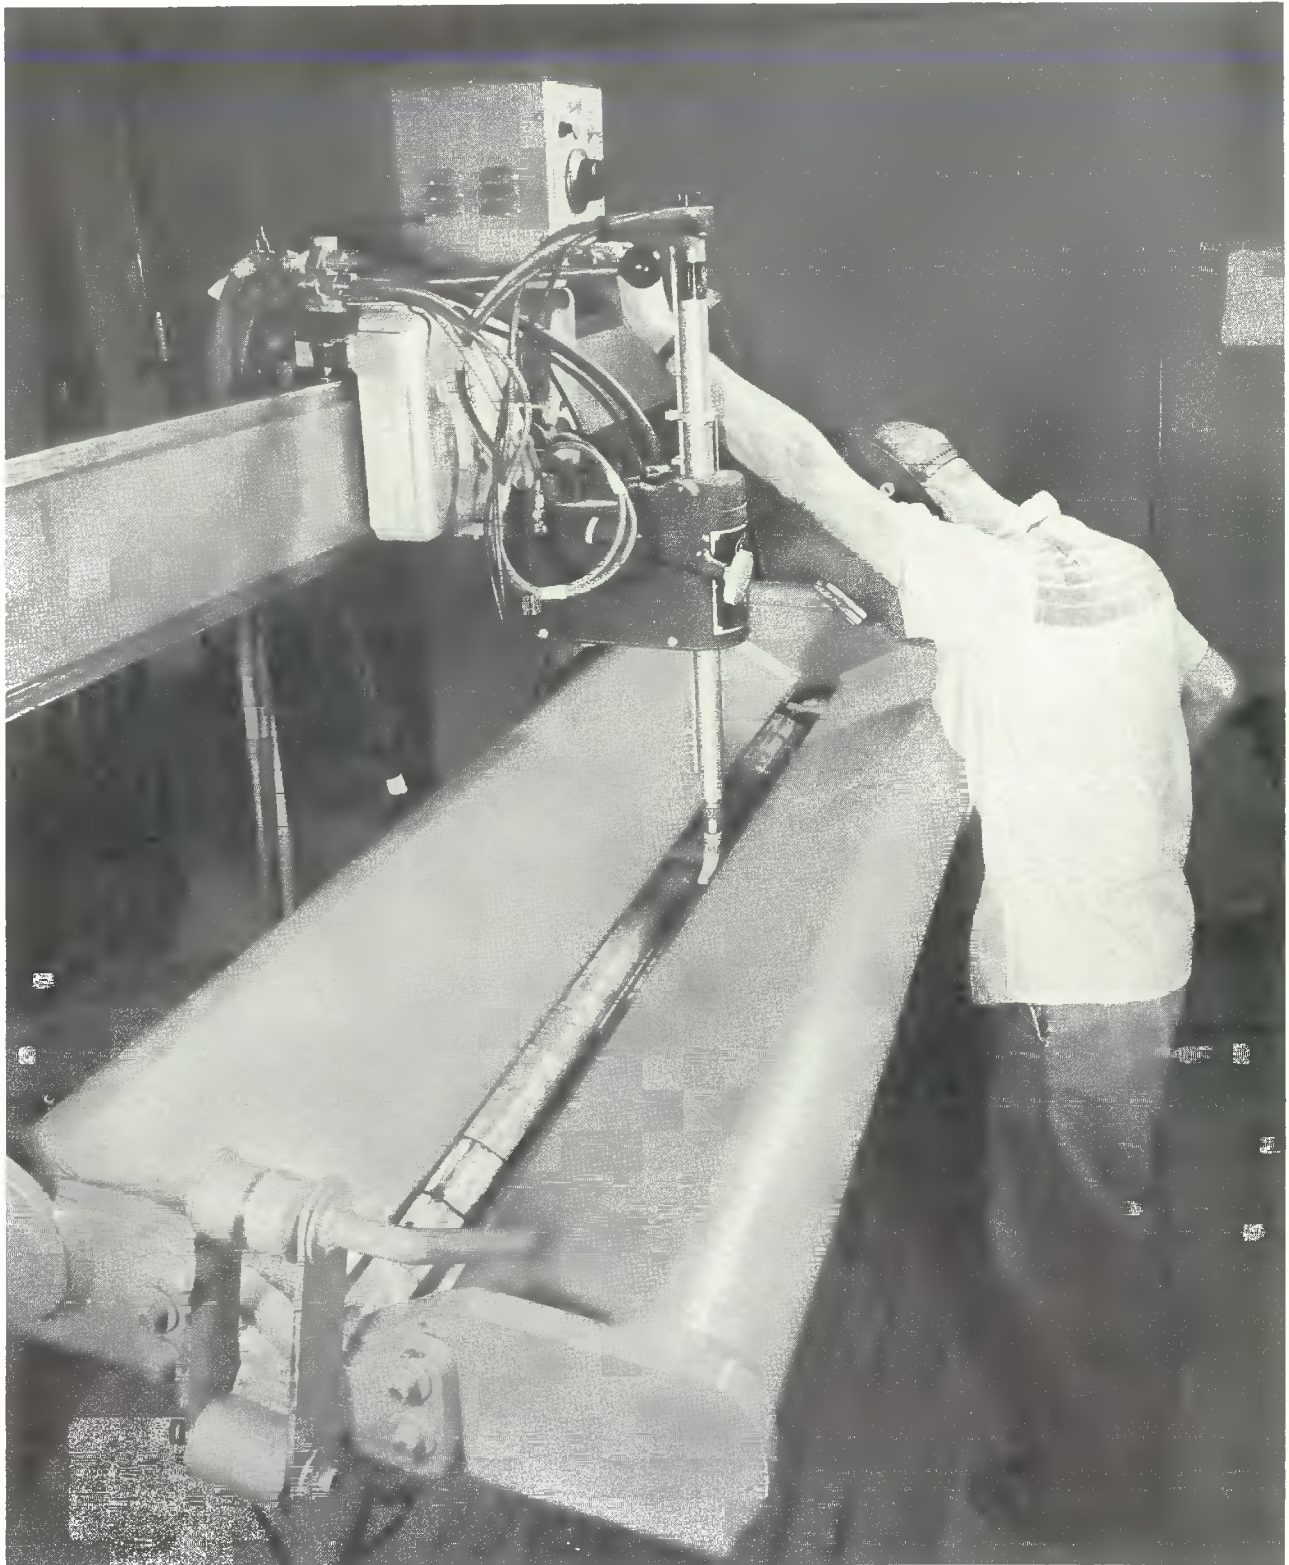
Seam Welding Corners of Fuel Box on Welding Stake
